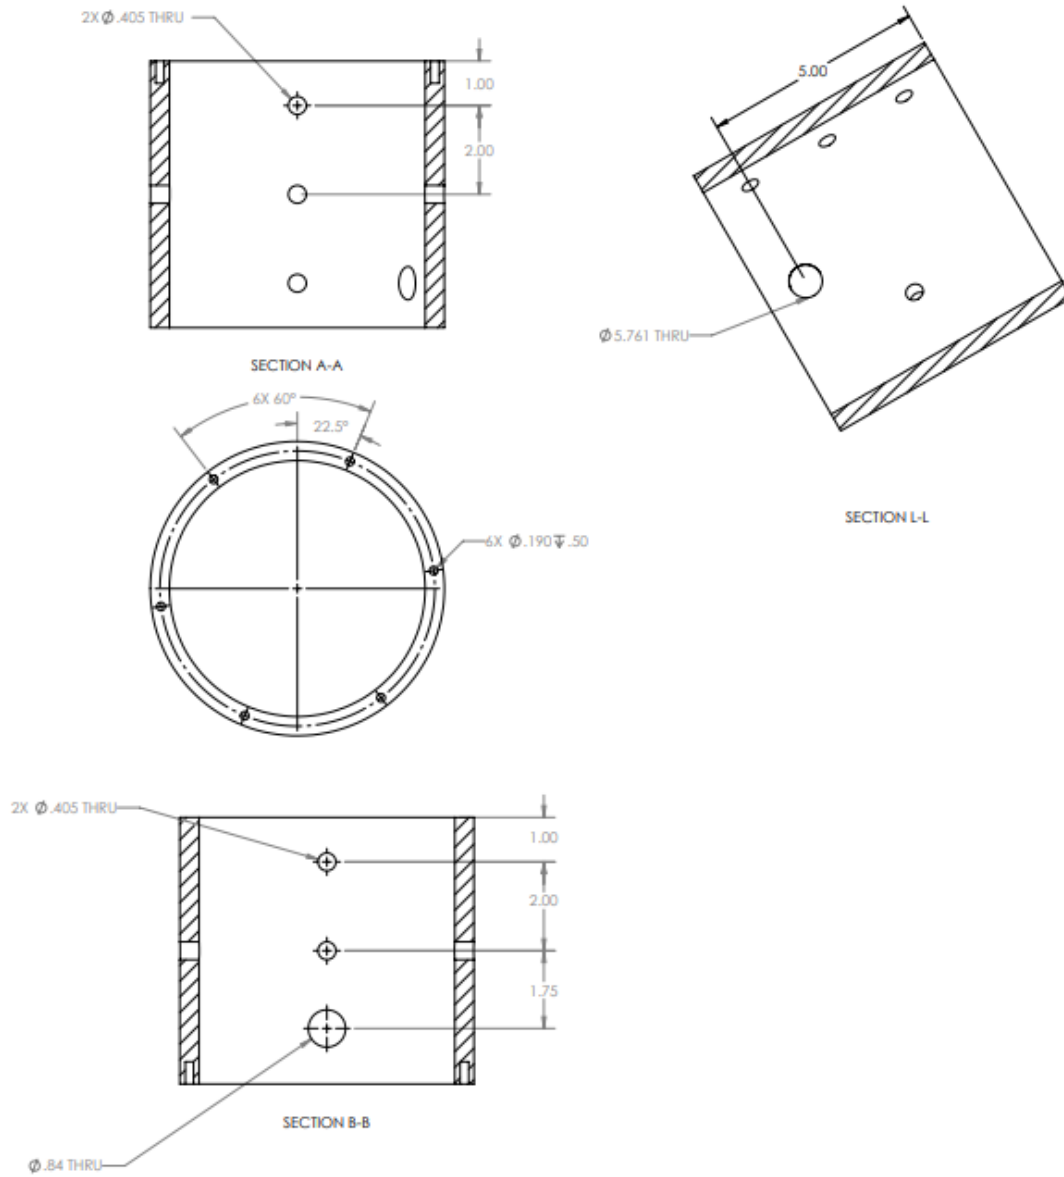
Solidworks Drawing of Airbox with Injector Plate Interface and Side Profiles
